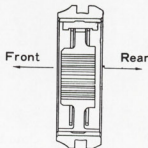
Installing Direction of Synchronizer X3678 Unit No.2
